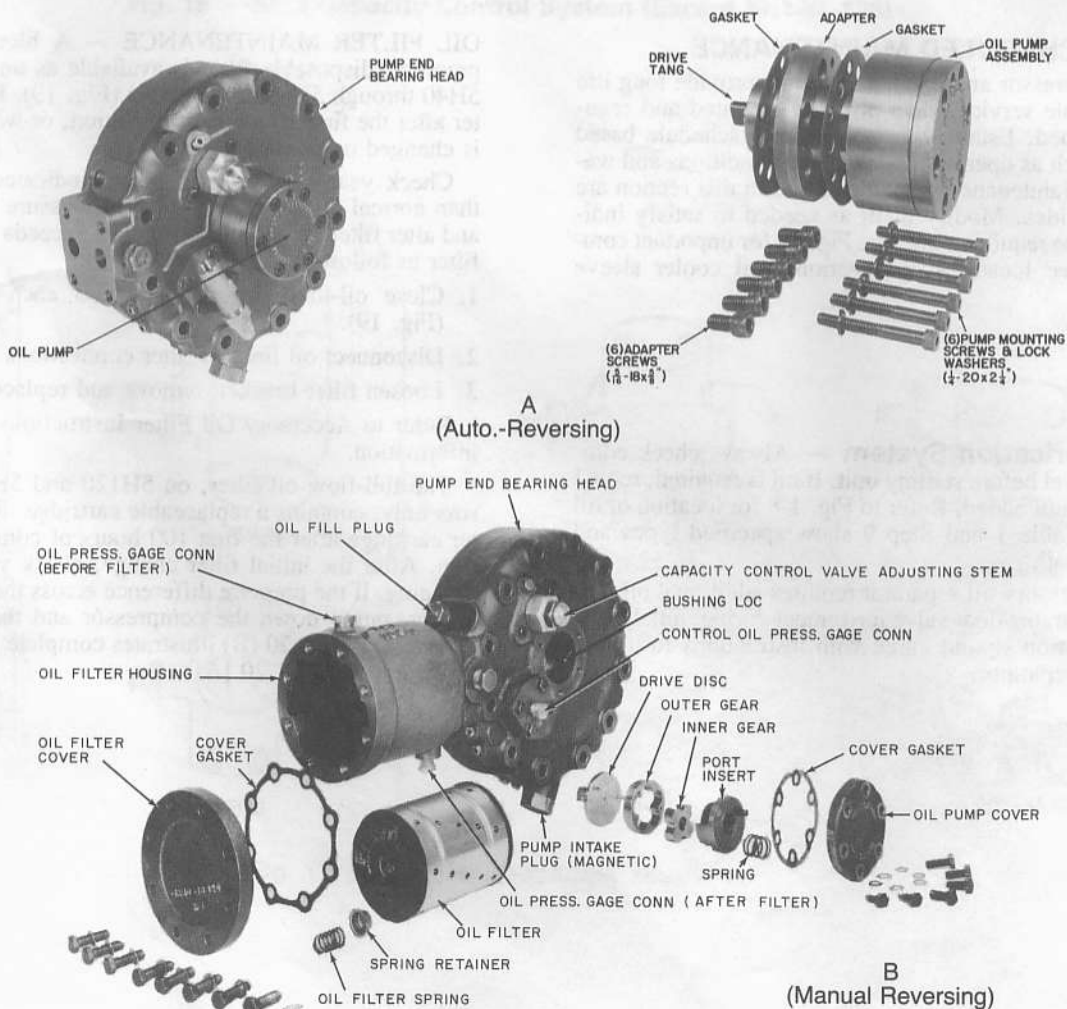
Oil Pump and Filter Assembly (5H120, 126)
